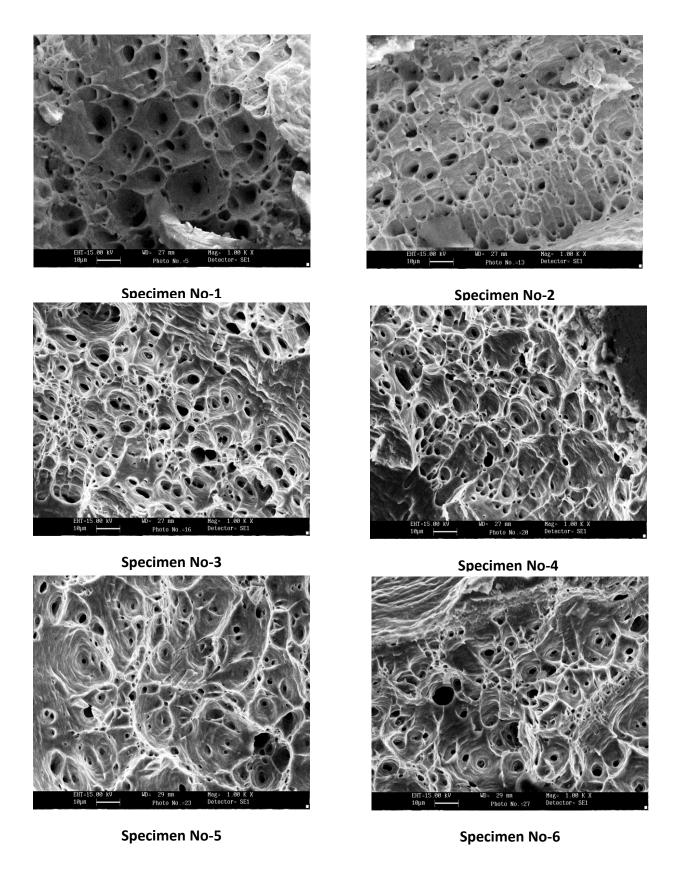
SEM fractographs of the tensile fractured surfaces of aluminum specimens
